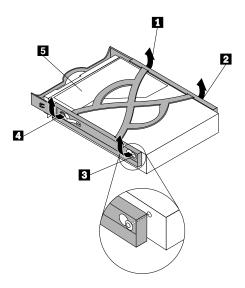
Installing a 3.5-inch hard disk drive into the bracket
